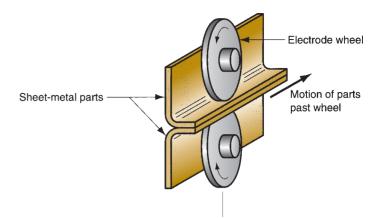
Resistance seam welding (RSEW).
